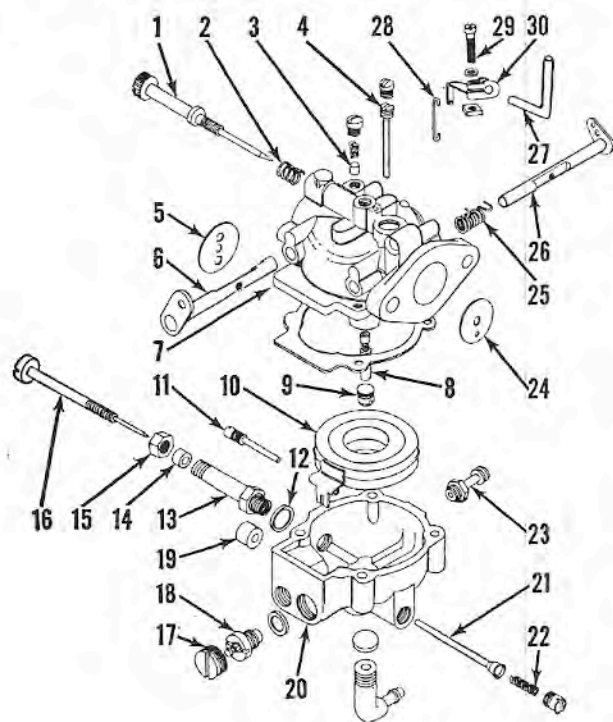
Exploded view of Tillotson MD carburetor.
